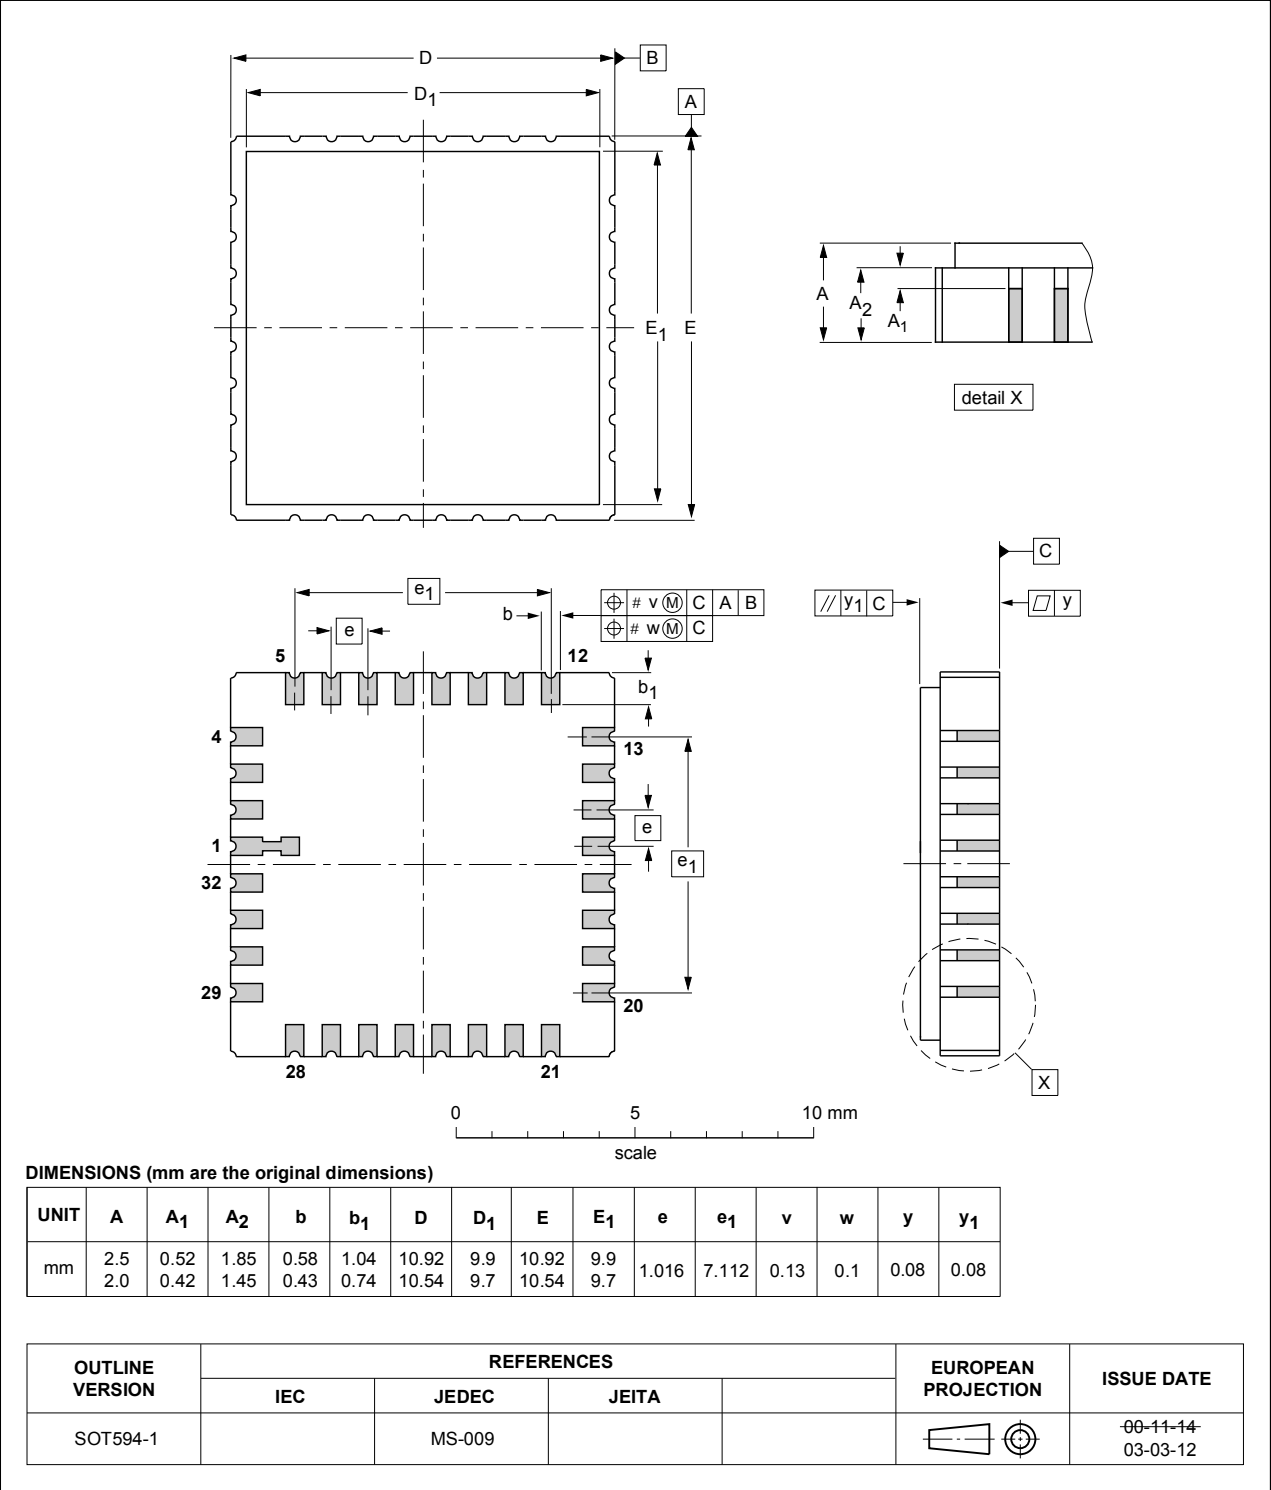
Package outline CWQCCN32 (SOT594-1)
